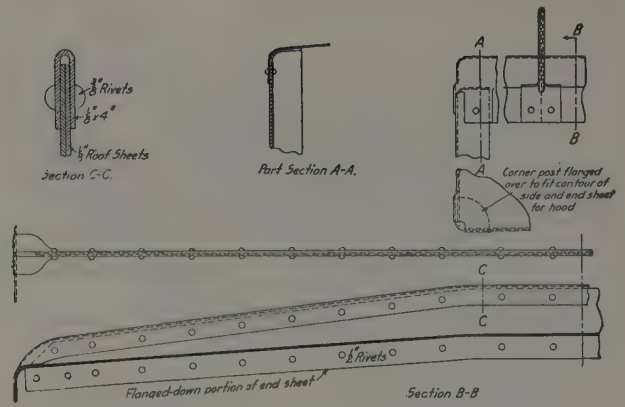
Details of Steel Roof for Summers All-Steel Box Car. Summers Steel Car Company
